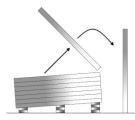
Handling equipment as well as gloves must be clean and such not to damage the items.
